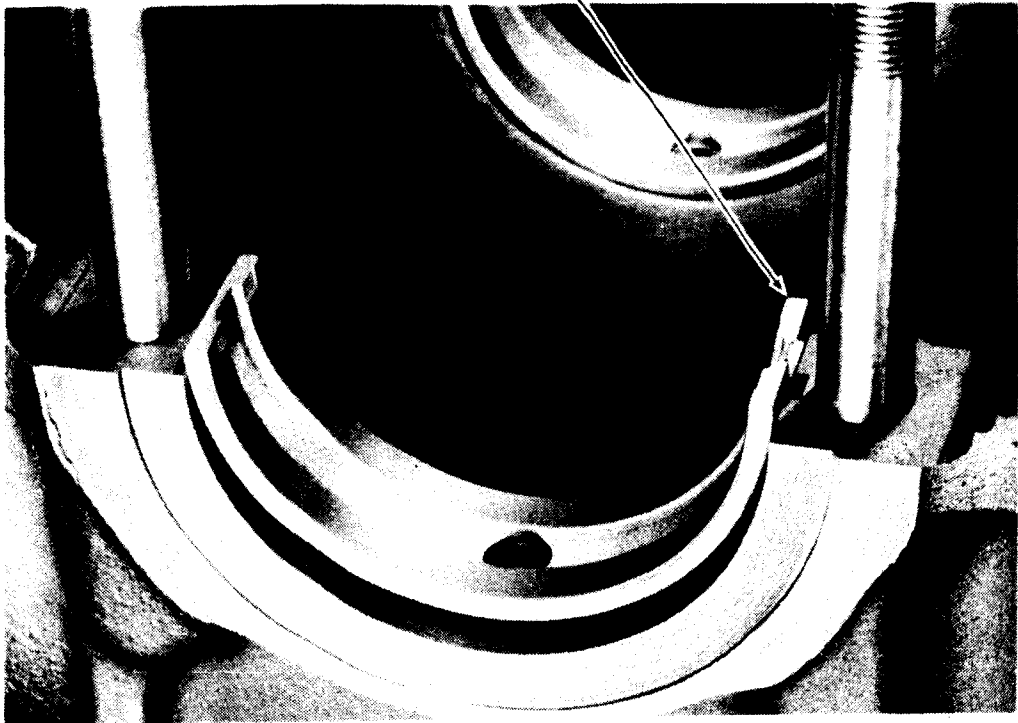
Installing Crankshaft Main Bearing Shell—Upper
